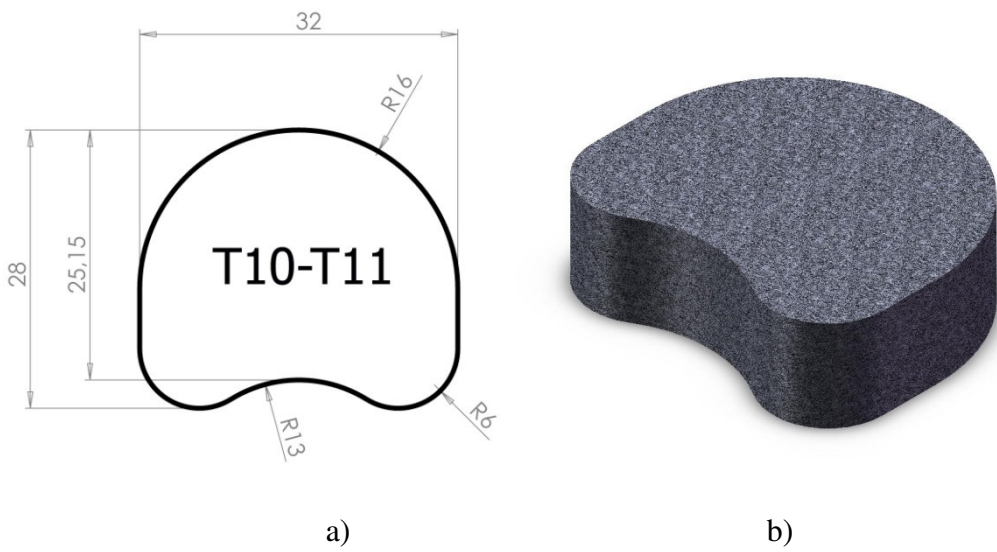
a) Technical drawing and b) solid model of spinal cage belongs to T10-T11 vertebra segments.
